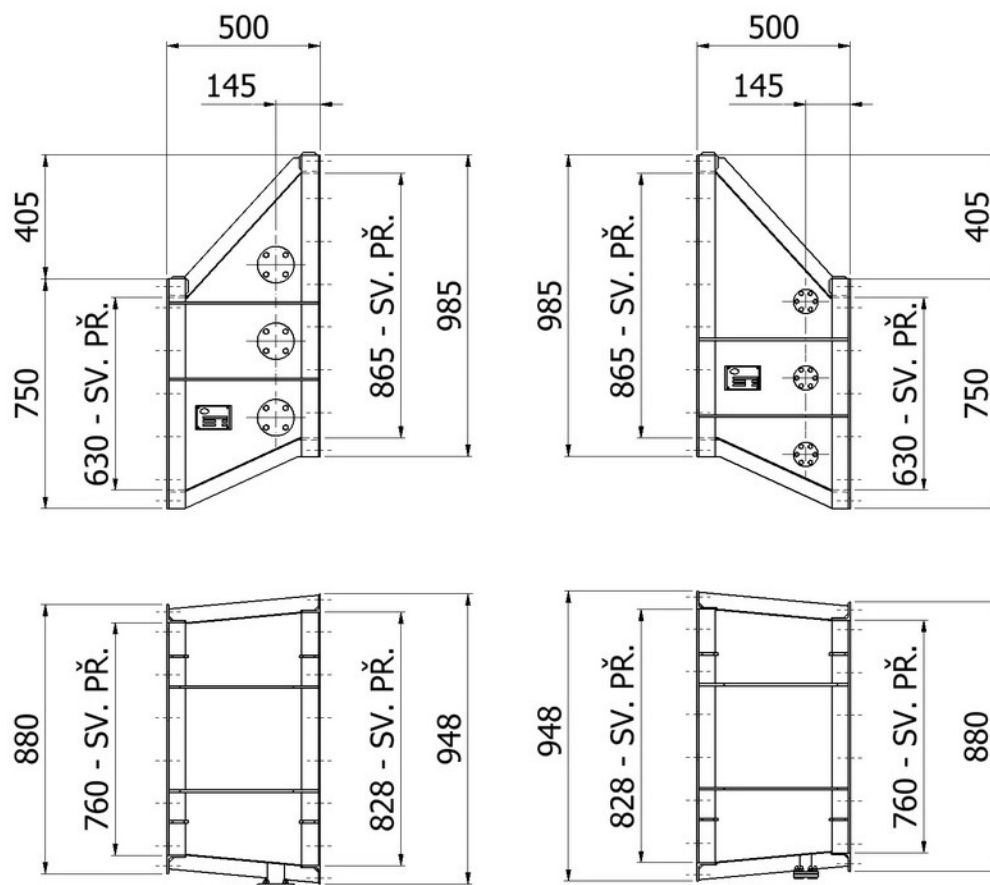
Main dimensions of the VSS 4 connecting parts, solid right-hand model
